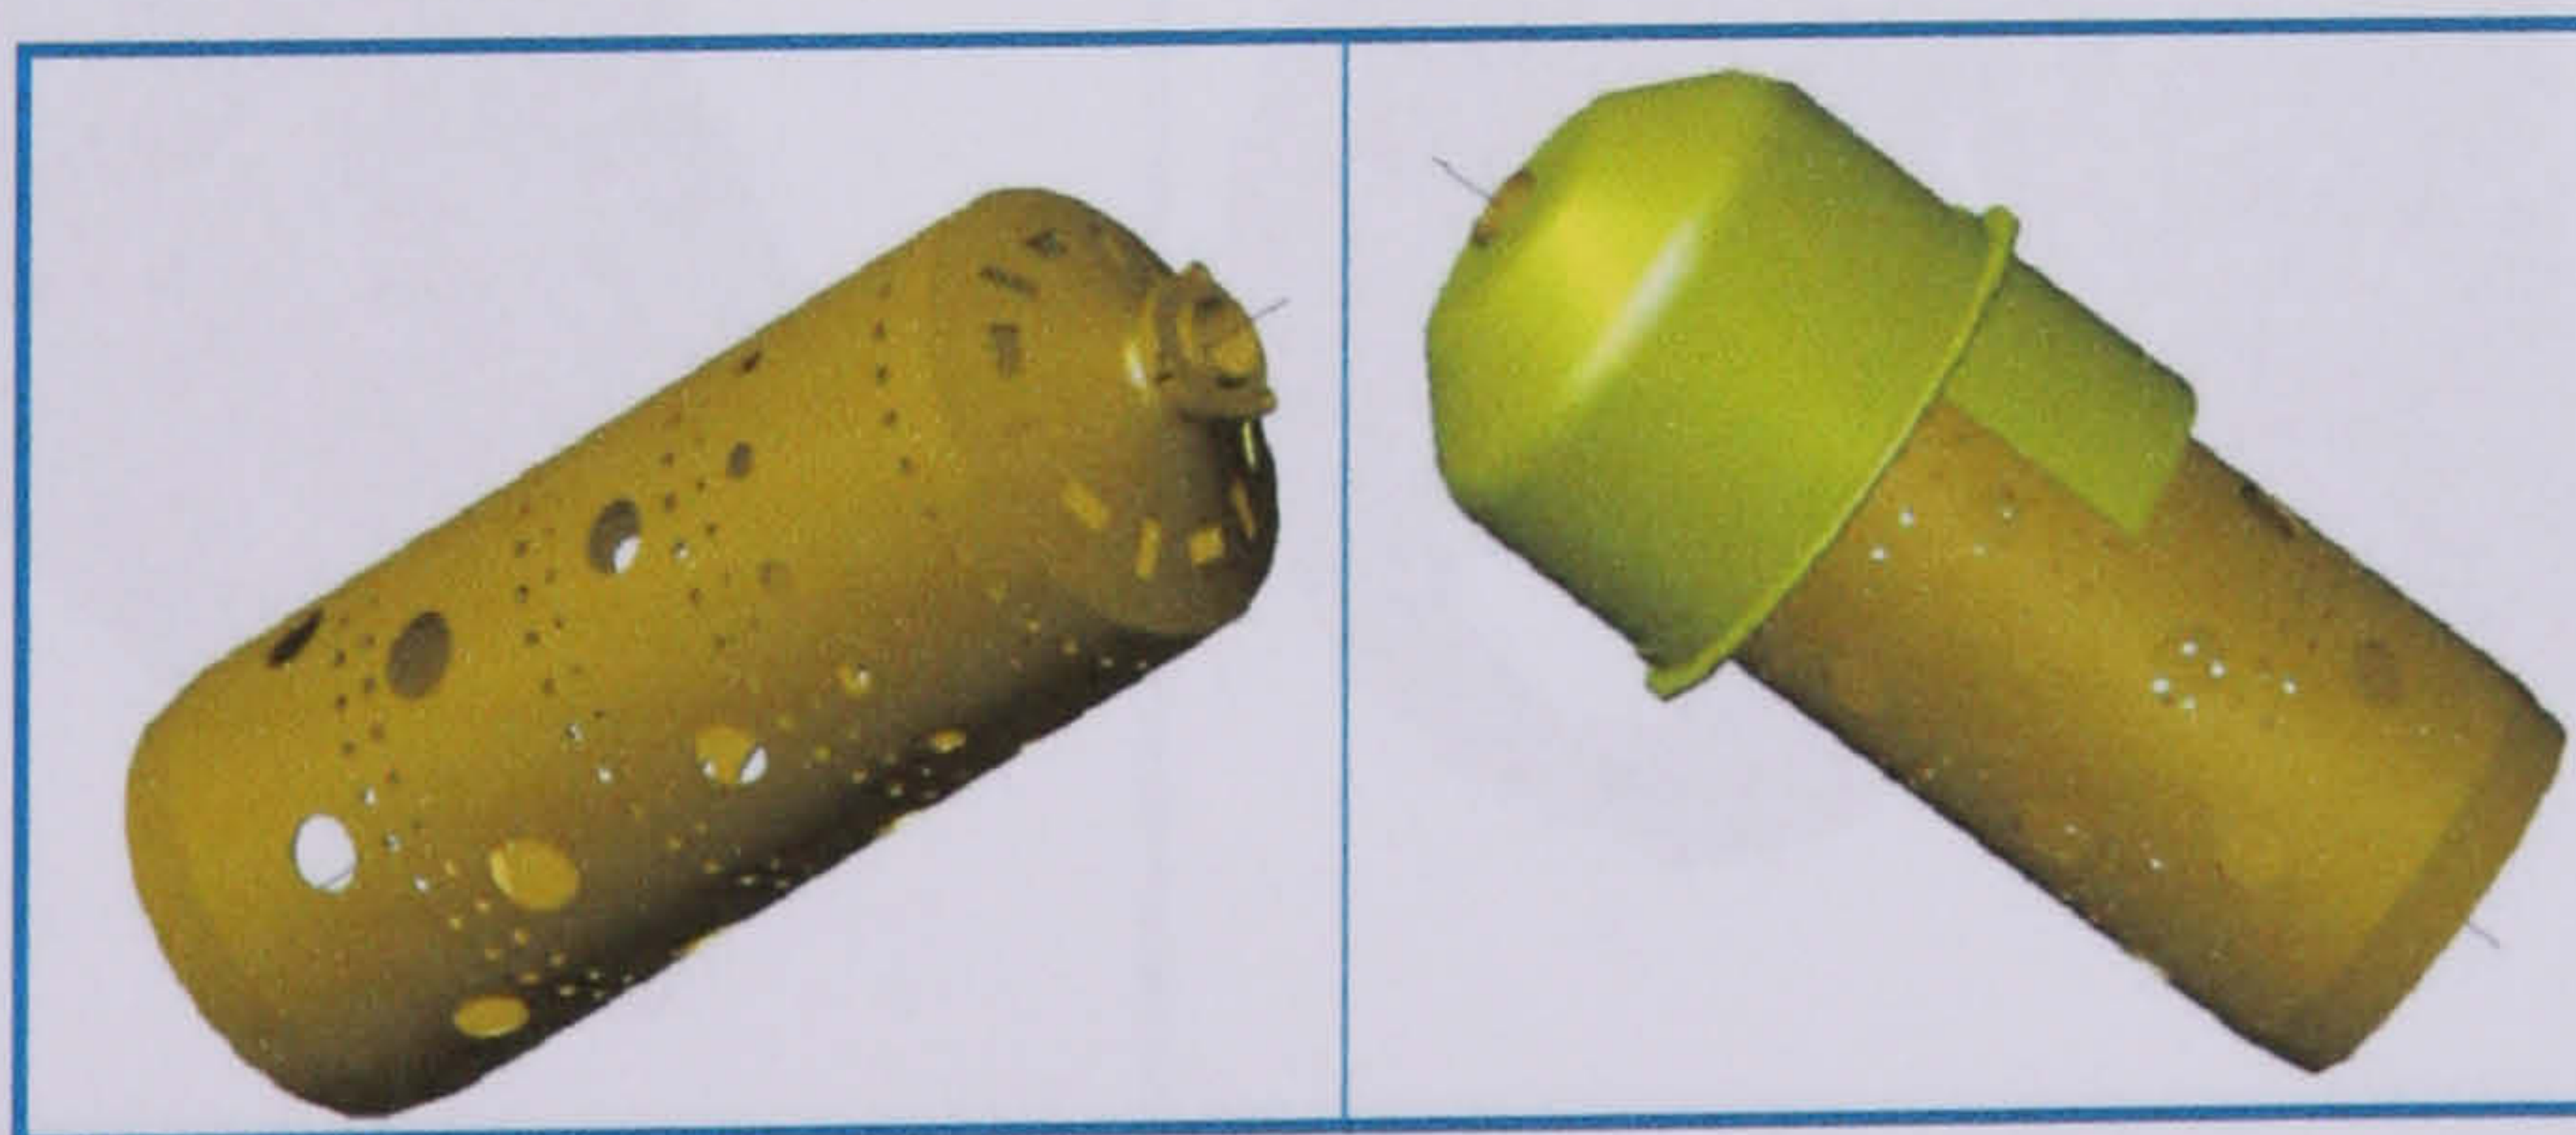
SOLID MODEL OF A SINGLE CAN COMBUSTOR LINER ADAPTED FROM AN AUXILIARY POWER UNIT, MODEL GTCP85
